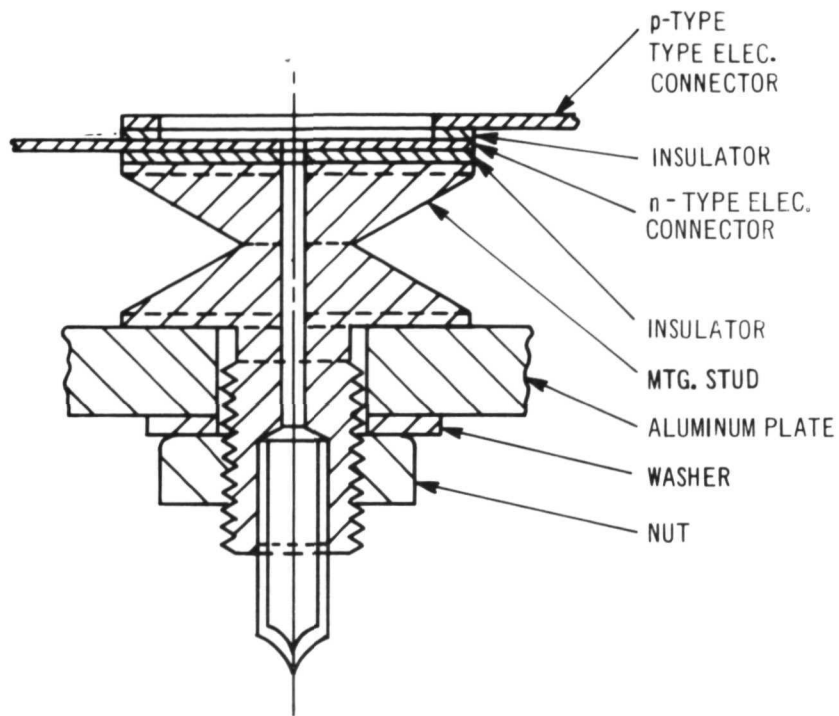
One Piece Copper T-Mount Stud - Cold Stack Design - Aluminum Plate
